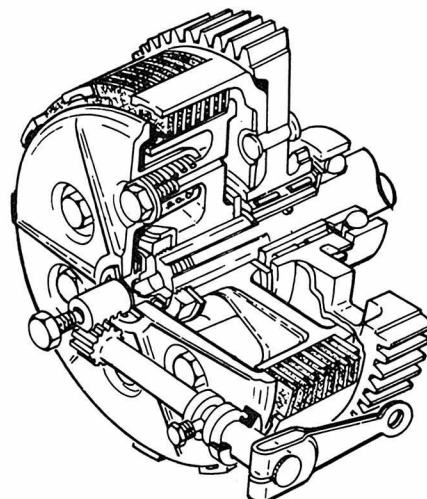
Cross sectional view of clutch and clutch release mechanism.
